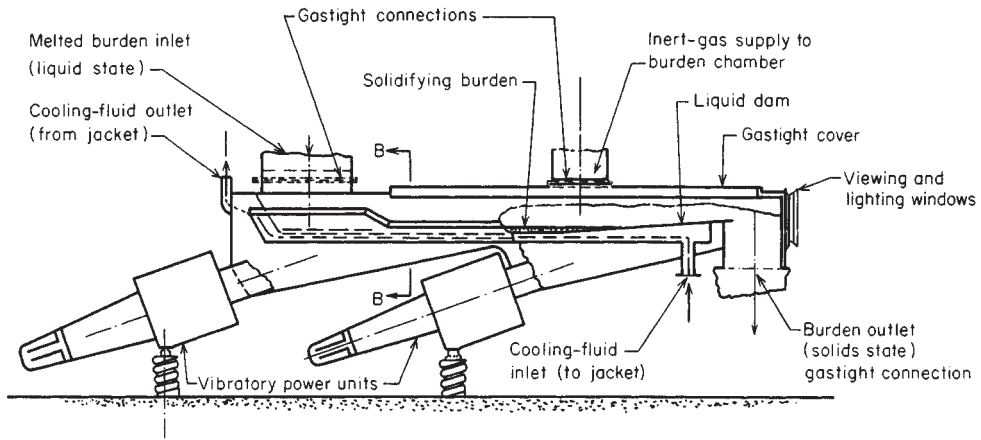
Heat-transfer equipment for batch solidification; vibrating-conveyor type. (Courtesy of Jeffrey Mfg. Co.)
